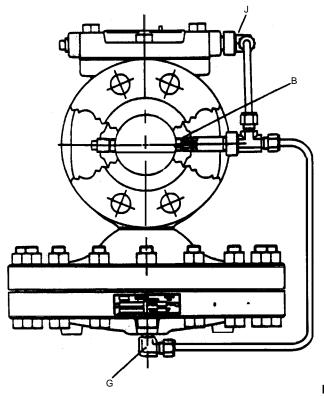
Top of valve must be completely assembled and head must be on seat when adjusting pressure plate and when re-assembling diaphragms to insure "A" = 1/8" for 2" valve.
